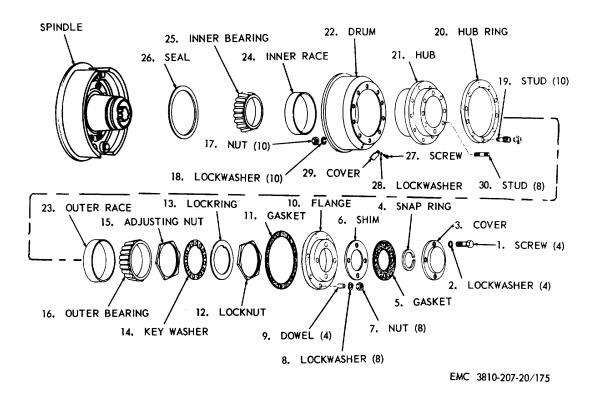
Front wheel bearings, hub, and drum, exploded view.
